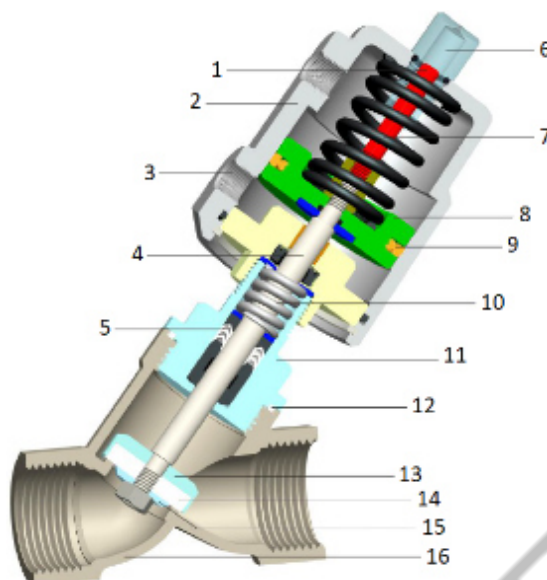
Seat valve with pneumatic control: 1 – indicator; 2 – drive housing; 3 – air connection port; 4 – stock; 5 – rod seals; 6 – cap; 7 – spring; 8 – the piston; 9 – piston seal; 10 – spring; 11 – cover; 12 – sealing of the case; 13 – saddle; 14 – saddle seal; 15 – washer; 16 – housing
